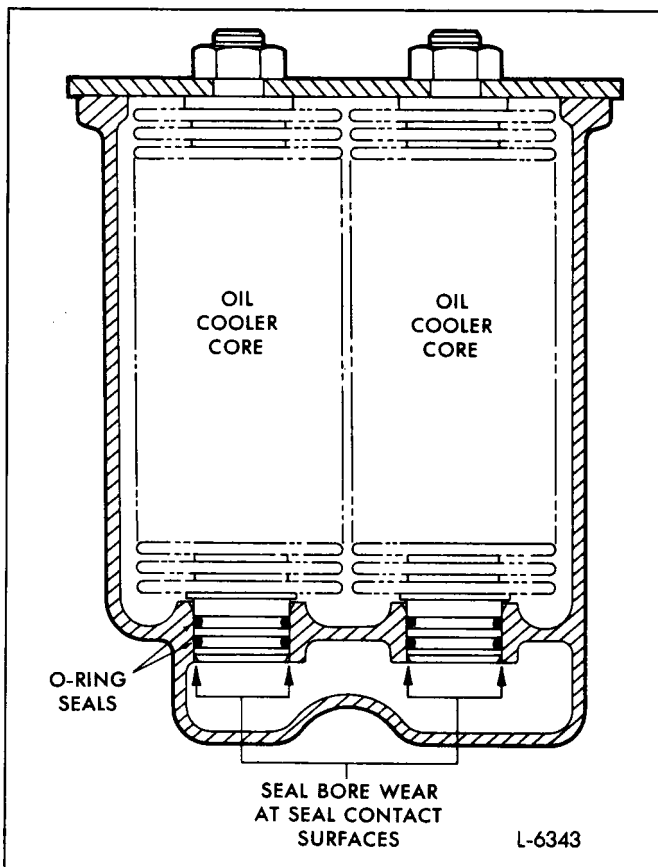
Oil Cooler Housing with Seal Bore Wear Area
